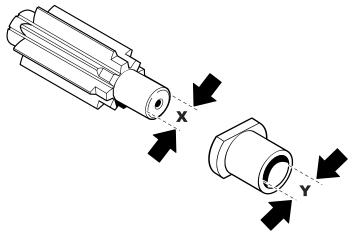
, Final Pinion Shaft and "Loose" Bushing Clearance
